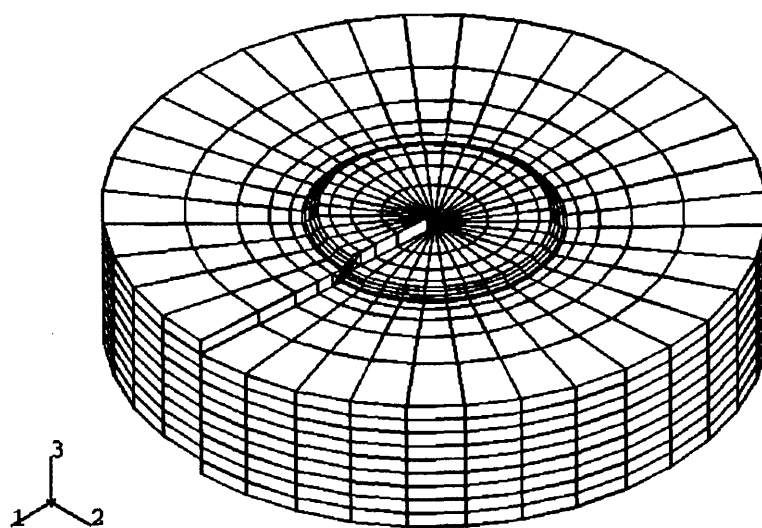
The three dimensional models of the 1 inch 12UNF and 16UNF bolted joint assembly
